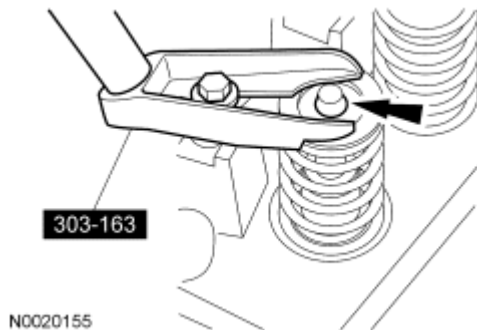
Removing Valve Spring Retainer Keys Using Special Tool (303-163)
